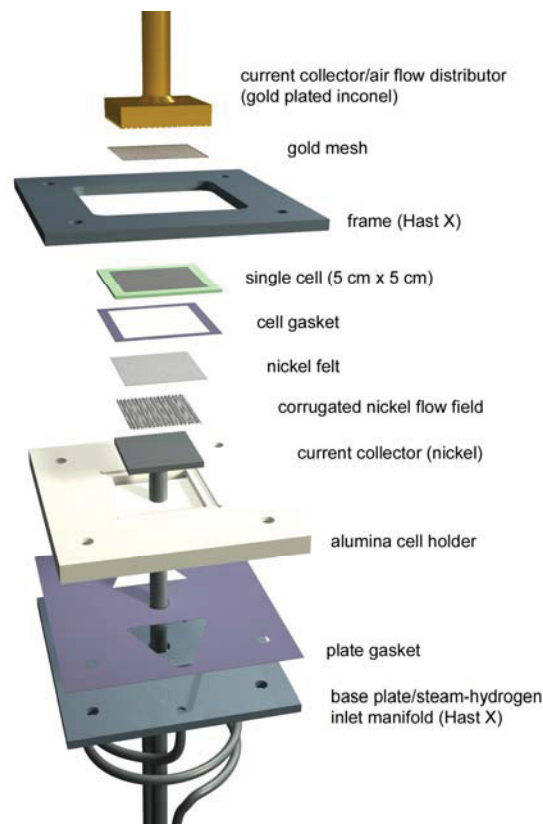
Exploded view of the cell fixture used for testing MSRI and St. Gobain SOECs.
